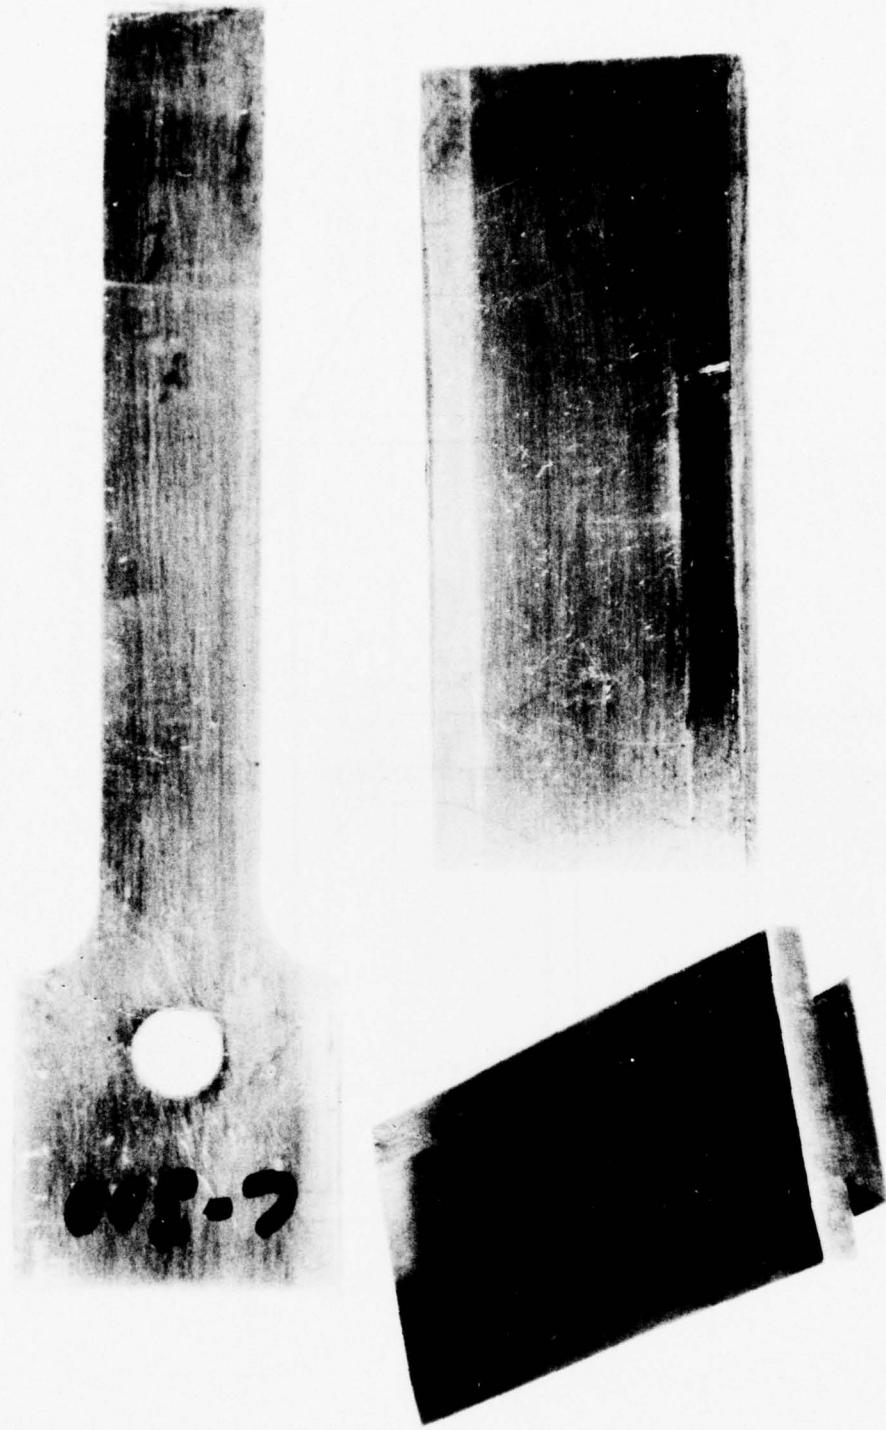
Photograph of the strip-draw specimen and the dovetail locked interchangeable dies used in the evaluation.
